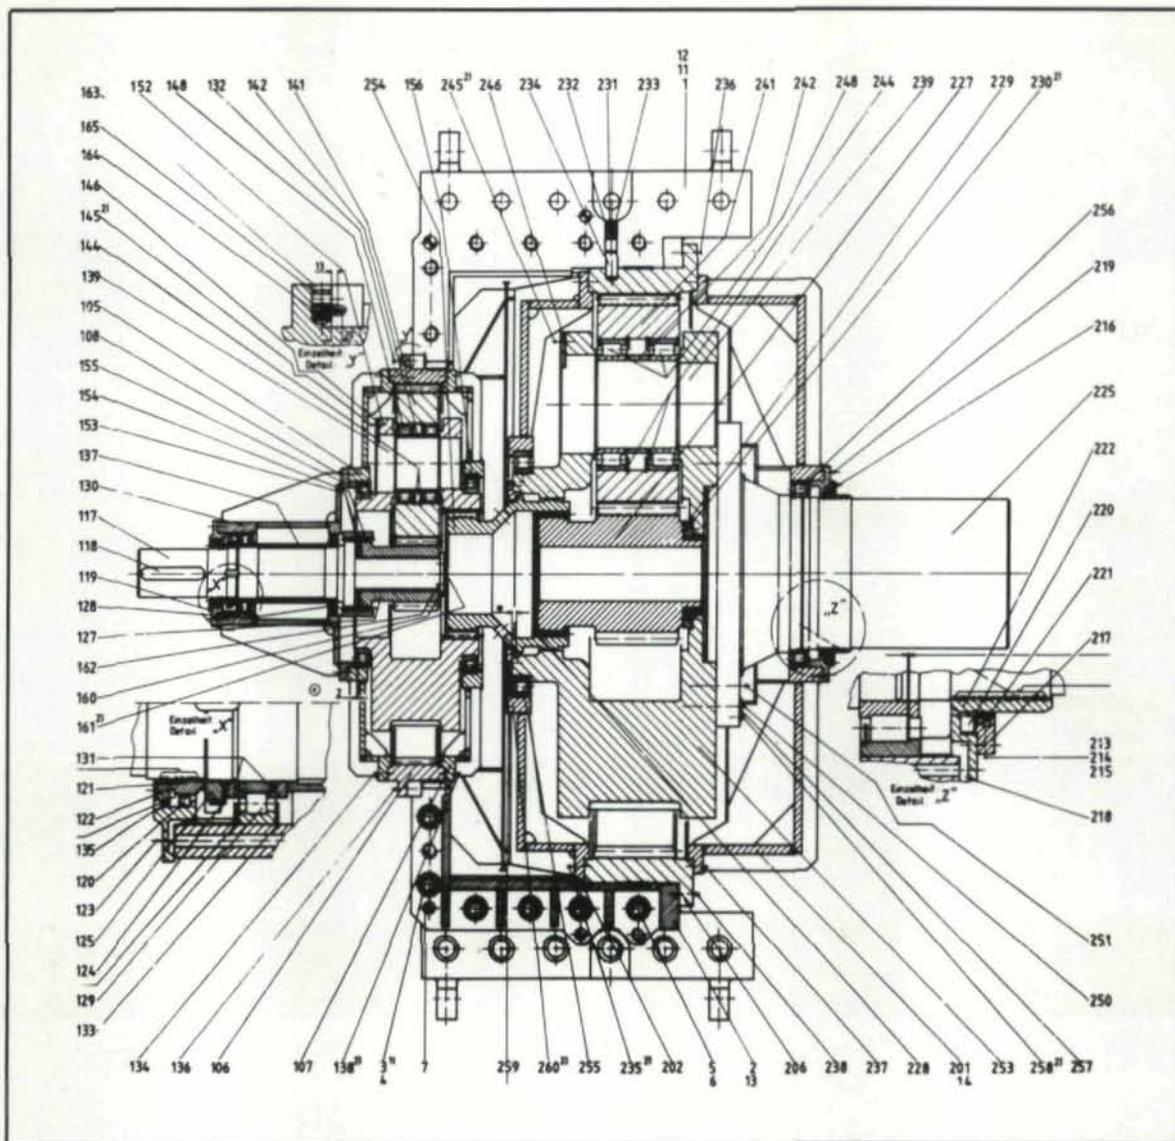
Two stage planetary gear unit for ball mill drive with three way power branching per stage. Transmission power $P = 4050 \text{ kW}$; shaft speeds $n_1 = 485 \text{ min}^{-1}$; $n_2 = 13.8 \text{ min}^{-1}$; gear unit weight $G = 72 \text{ t}$
